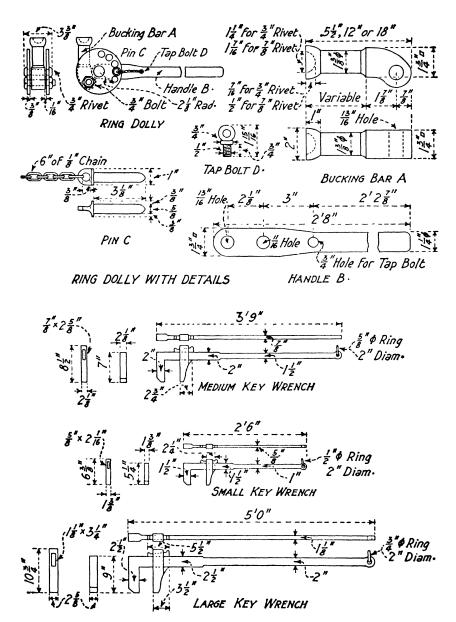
TOOLS FOR STEEL ERECTION. AMERICAN BRIDGE COMPANY.
